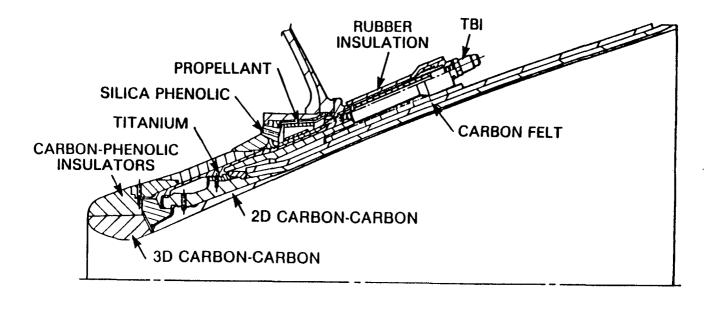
Star 48 nozzle assembly with carbon/carbon exit cone.
